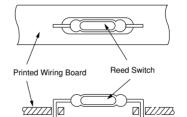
Example of mounting of reed Sswitch on warped printed wiring board
